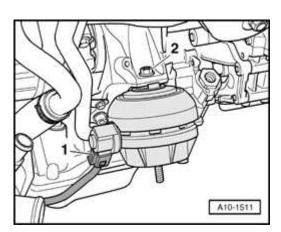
Disconnecting Electrical Connector, Removing Nut And Engine Mount
